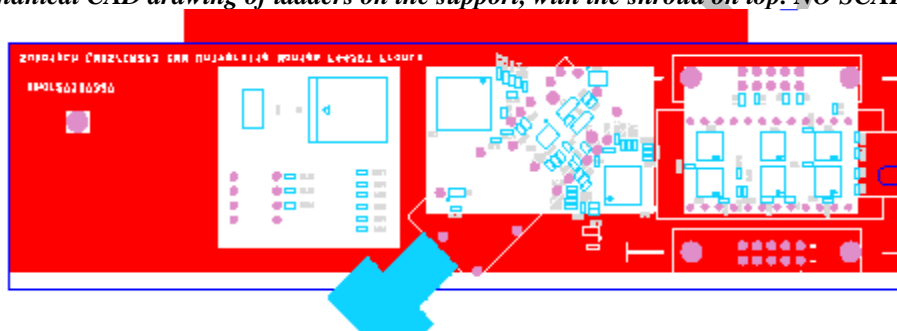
ladder card mechanical prototype with 45° rotated optical transceiver
